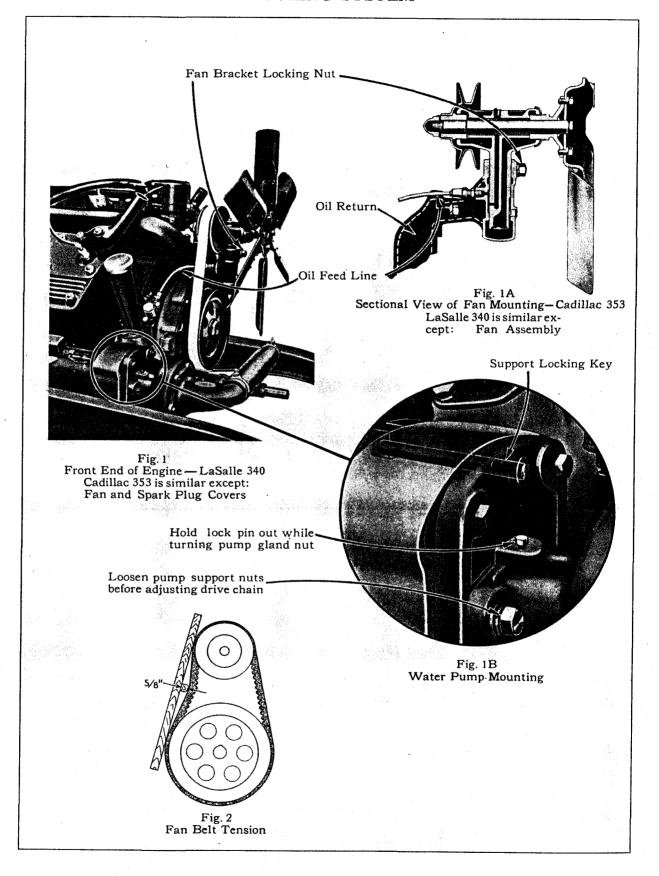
Fan and Water Pump Details Cadillac 353—La Salle 340
